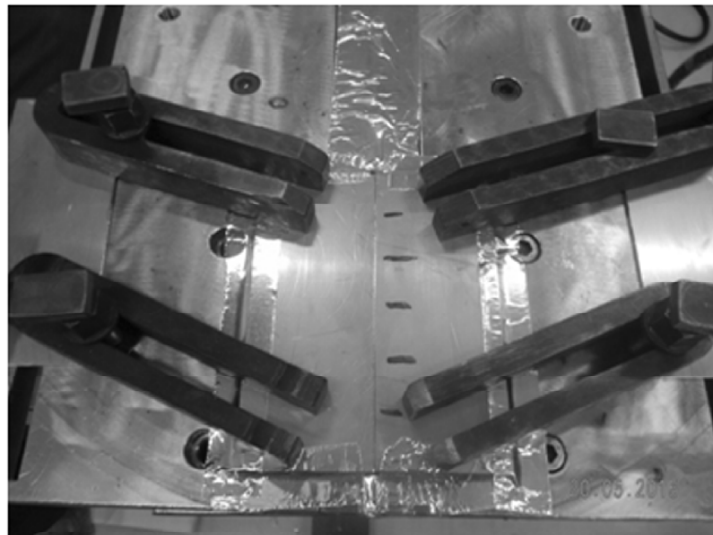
Photography of Square Butt Weld Joint Preparation
